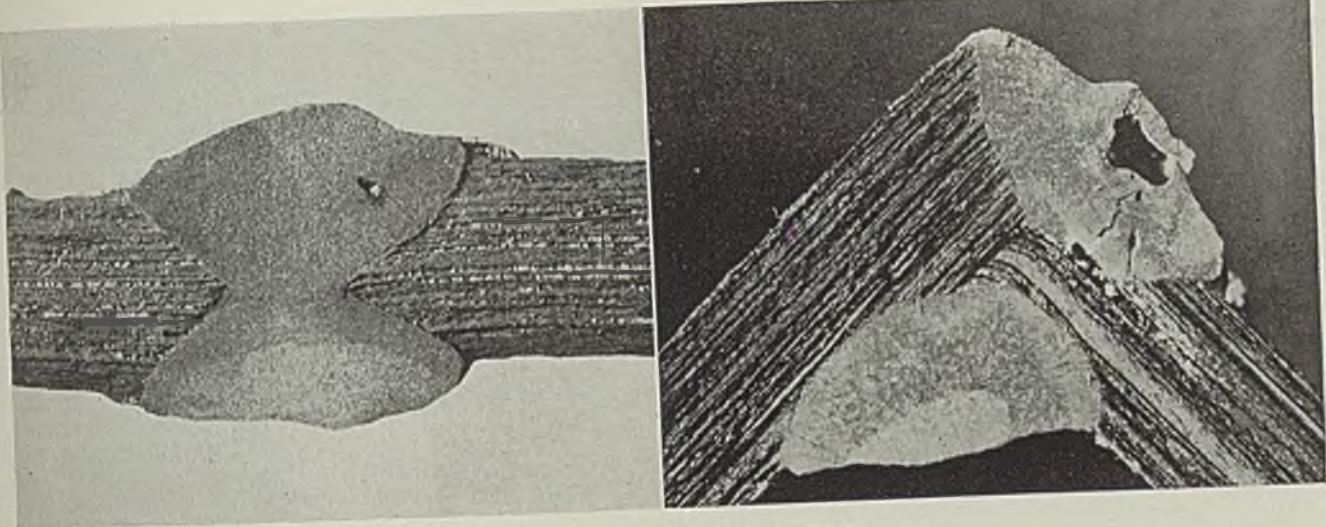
(Left)—A proper butt weld in 5/16-inch wrought iron plate. Fig. 3. (Right)—This faulty weld resulted from improper welding technique
